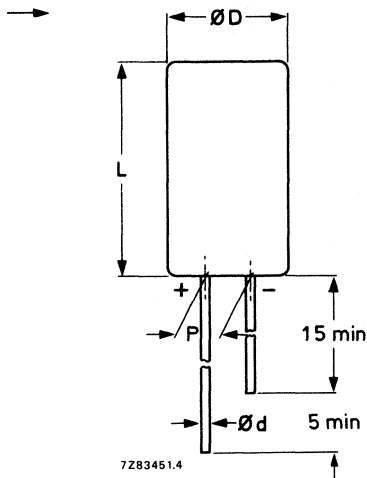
Style 1: see Table 3 for dimensions ϕd , ϕD , L and P.
